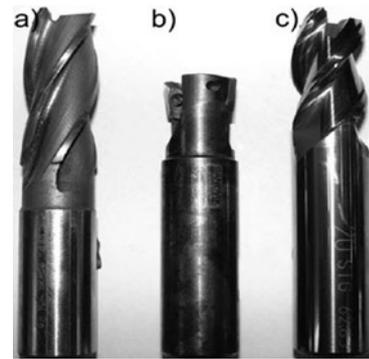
Tools that were used for machining: a) NFPa, b) R390-020B20-11L, c) E5423200
